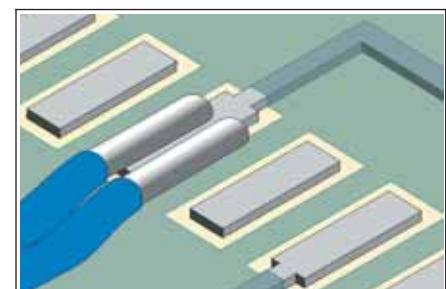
Not Recommended Multiple wires soldered to pad overhanging pad edge.
